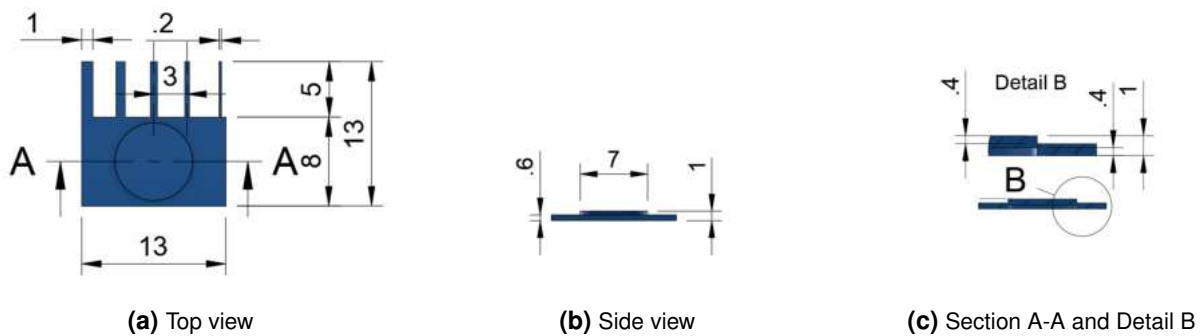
Technical Drawing of Test-Object with Measurements in [mm] Made Using Fusion 360 [11]
